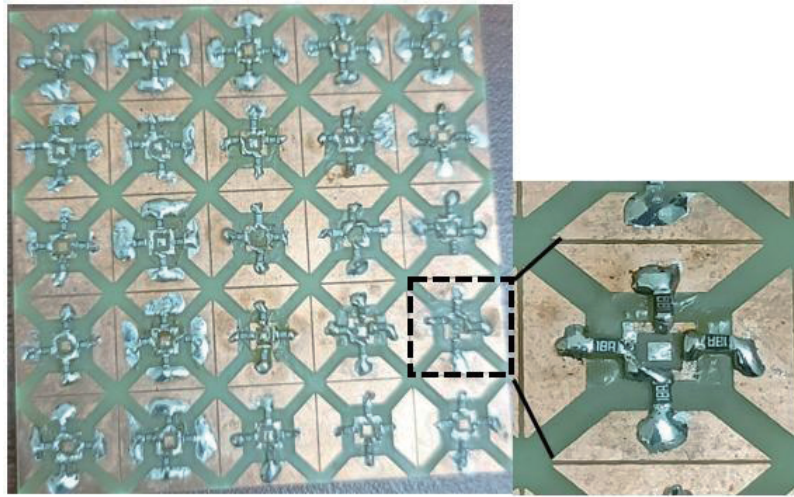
Array of fabricated sheet with enlarged version of single cell.
